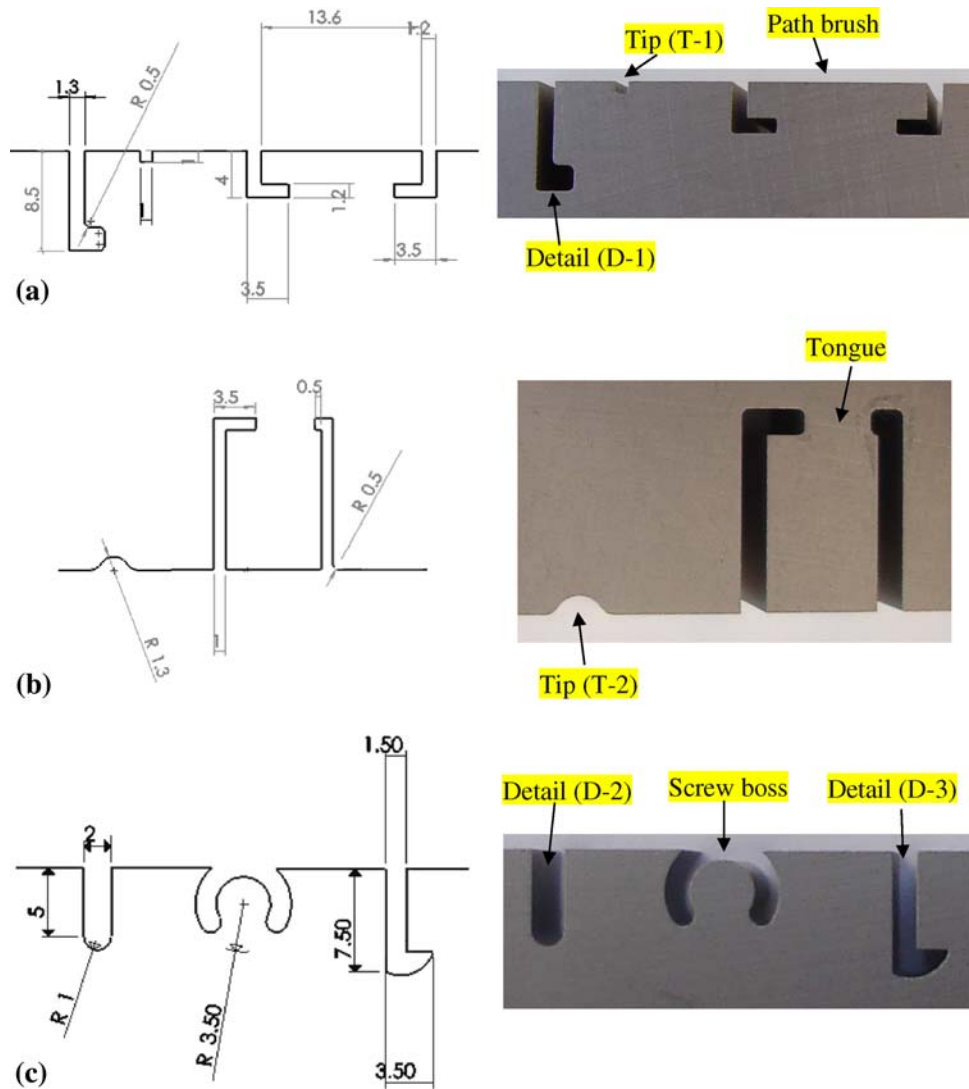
Dimensional drawings and actual samples (all dimensions are in millimeters). Studied profiles are highlighted
